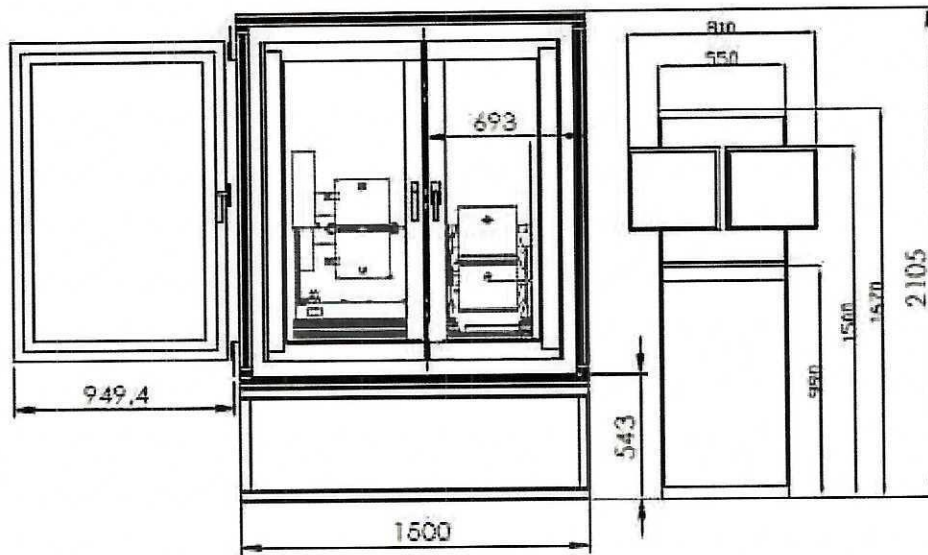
Front view of chamber and rack with dimensions and open service door.
